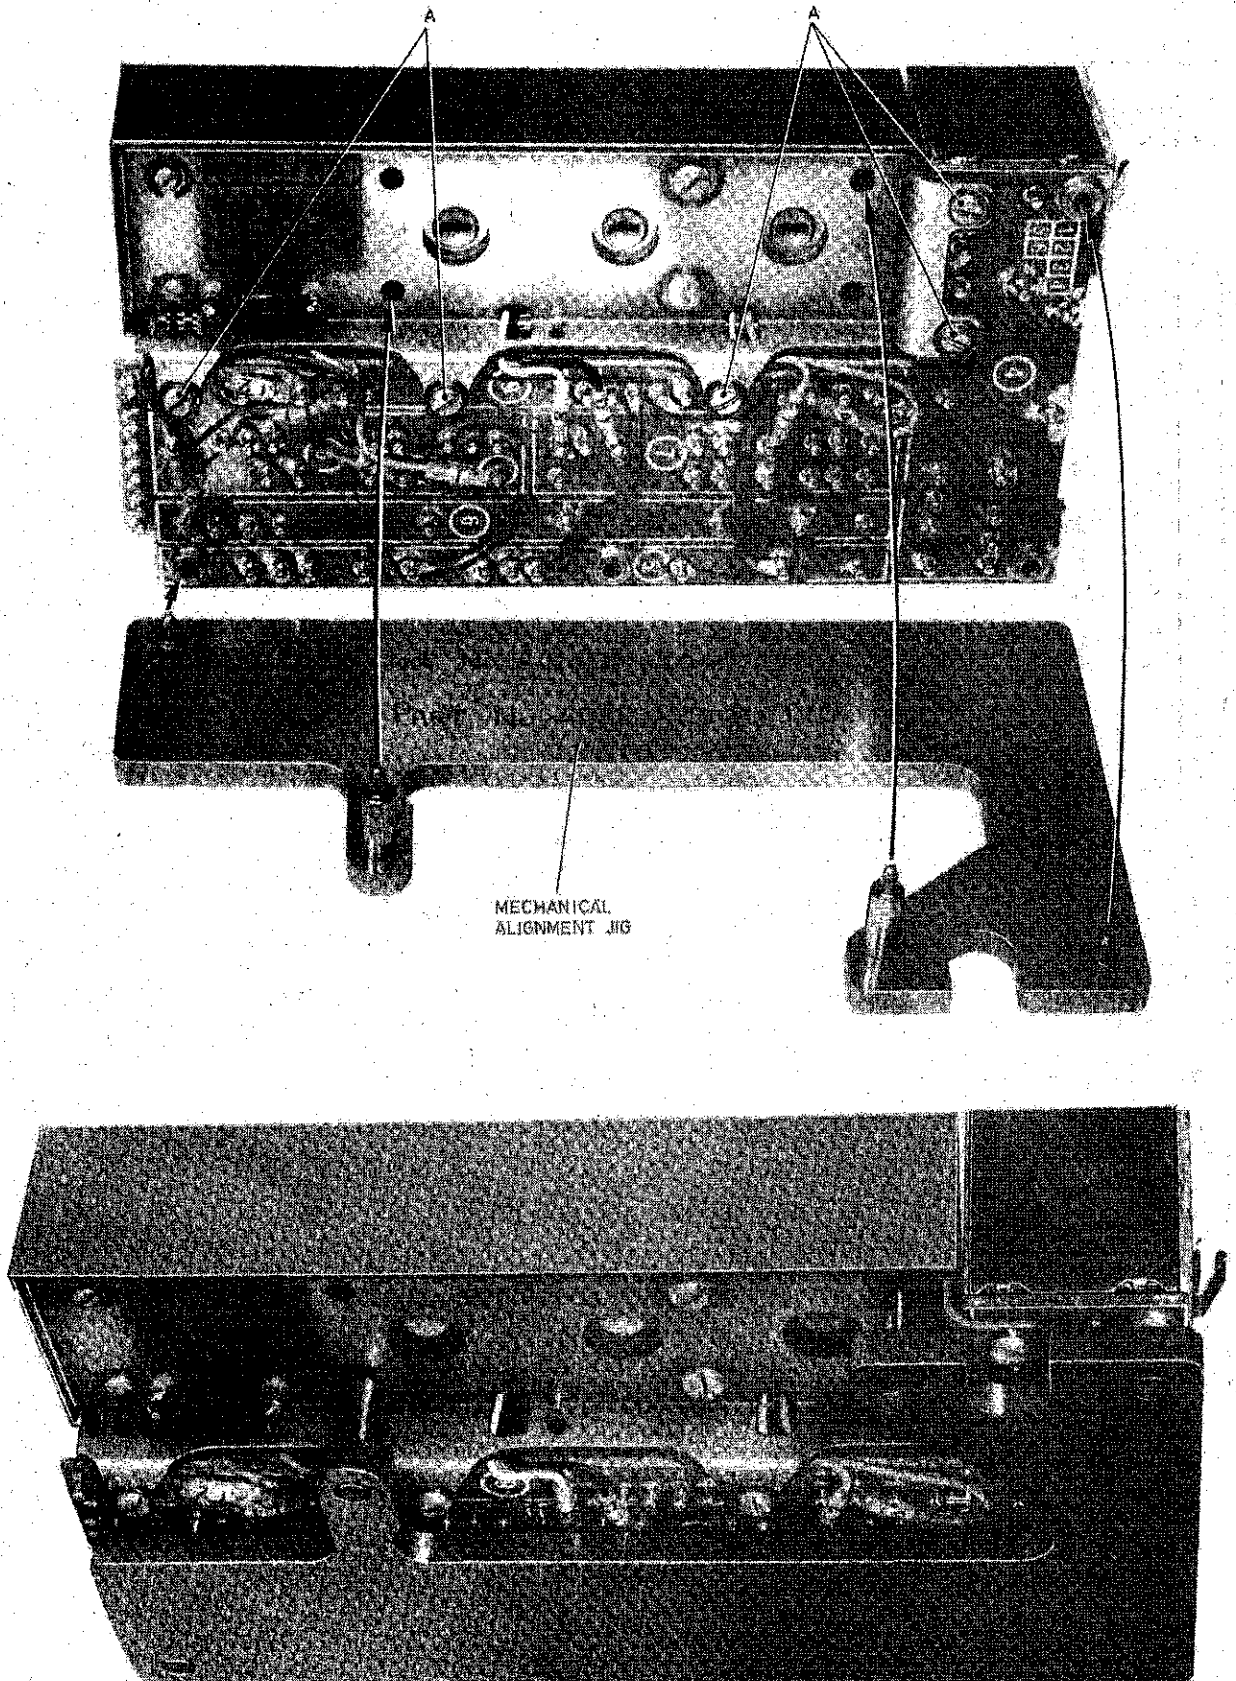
Fitting synthesizer-to-motherboard mechanical alignment jig
